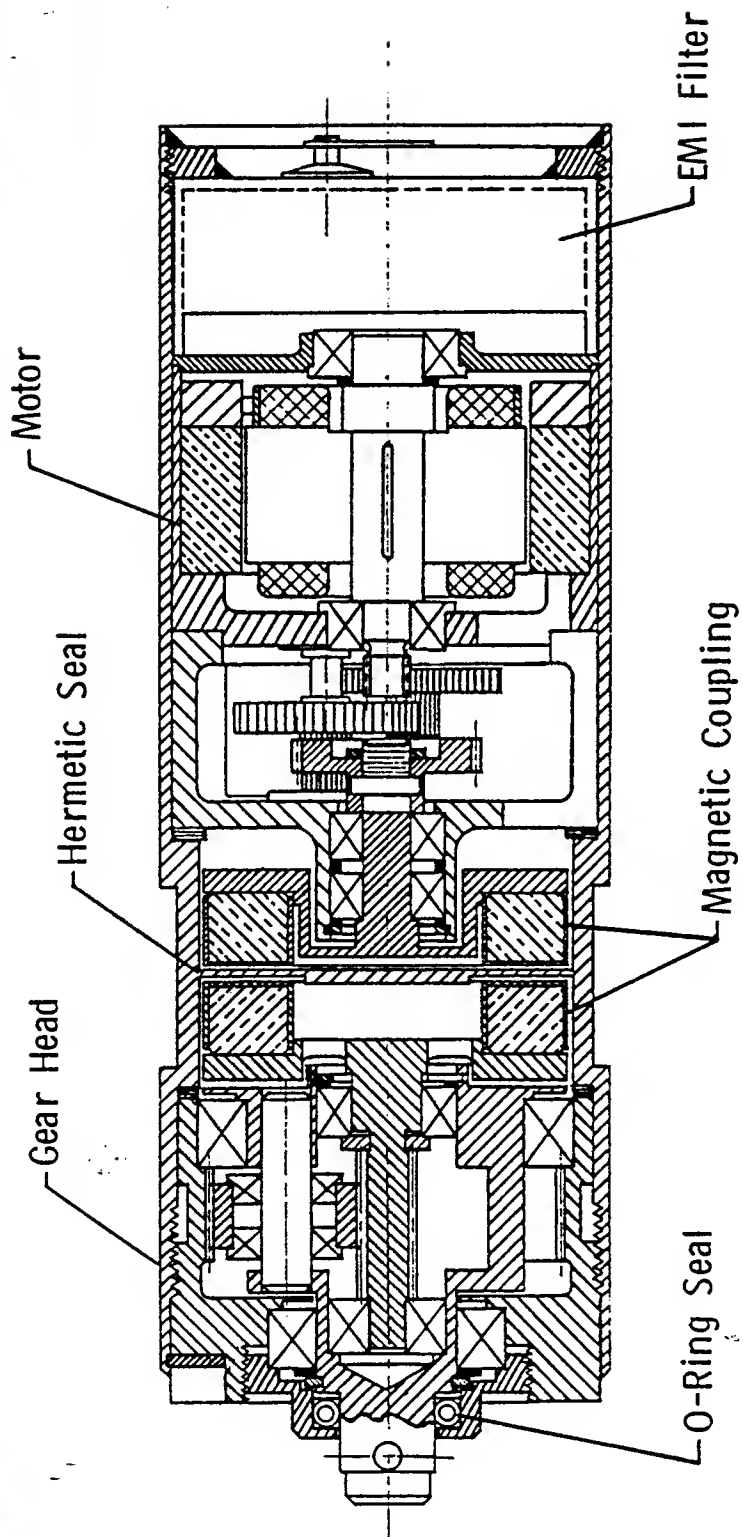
Hermetically Sealed DC Gearmotor.
